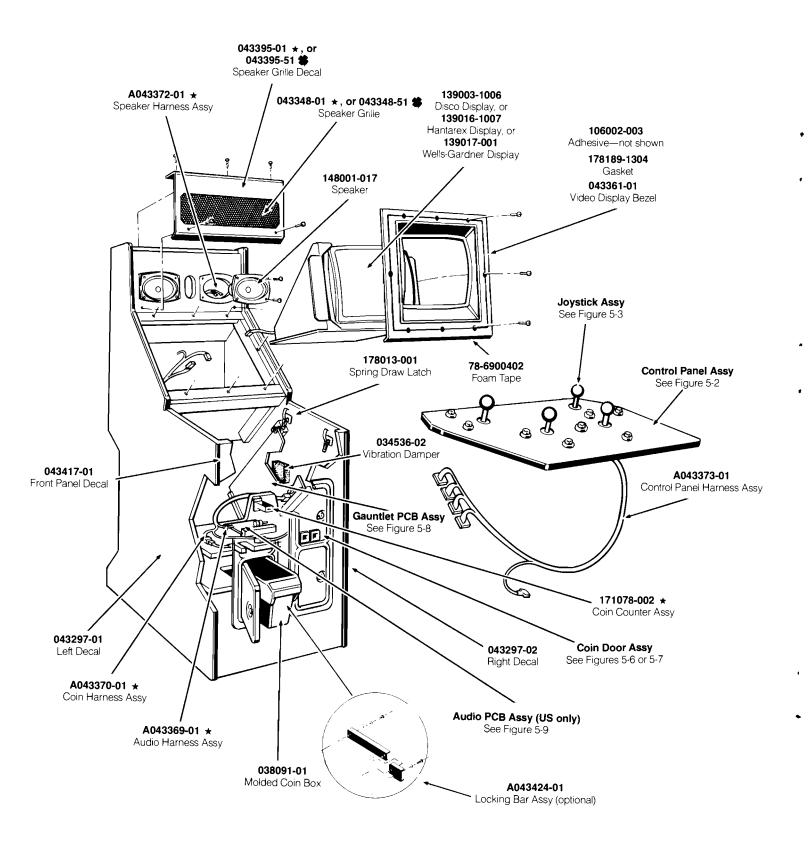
Cabinet-Mounted Assemblies A043350-01 and -51 D
